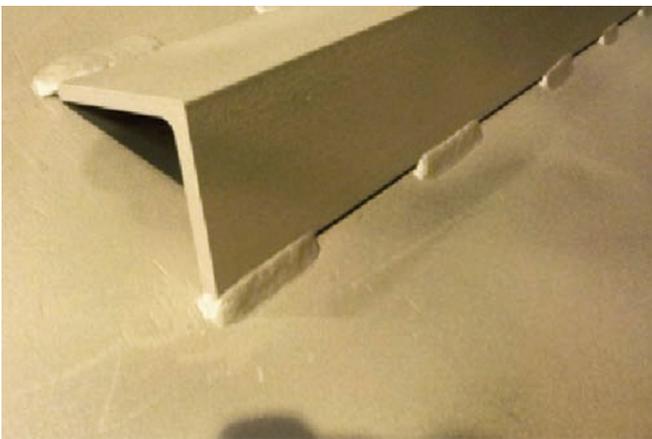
The skewed fillet to be measured with a fillet gauge.
